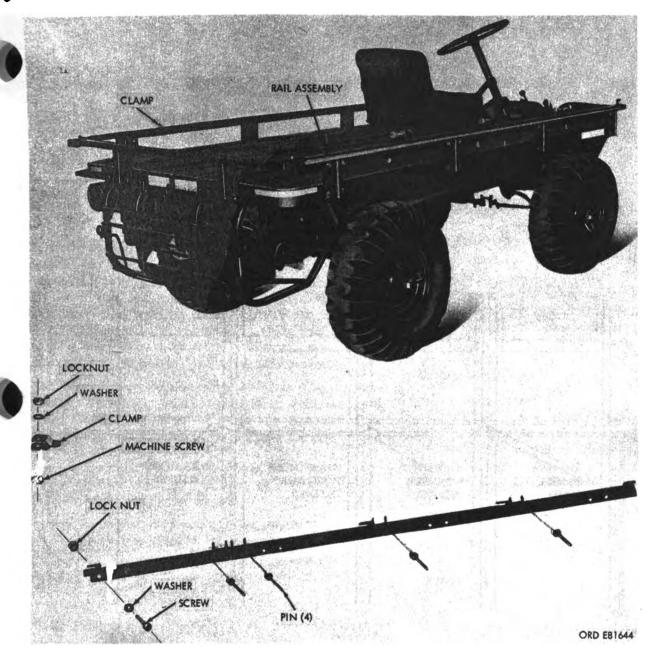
Location of rail assembly, machine screws, flat washers, and self-locking nuts.
